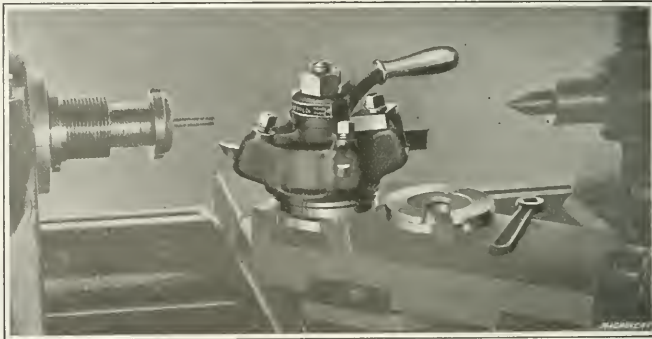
F-P-M Style C Turret Tool-holder set up on a Lathe
